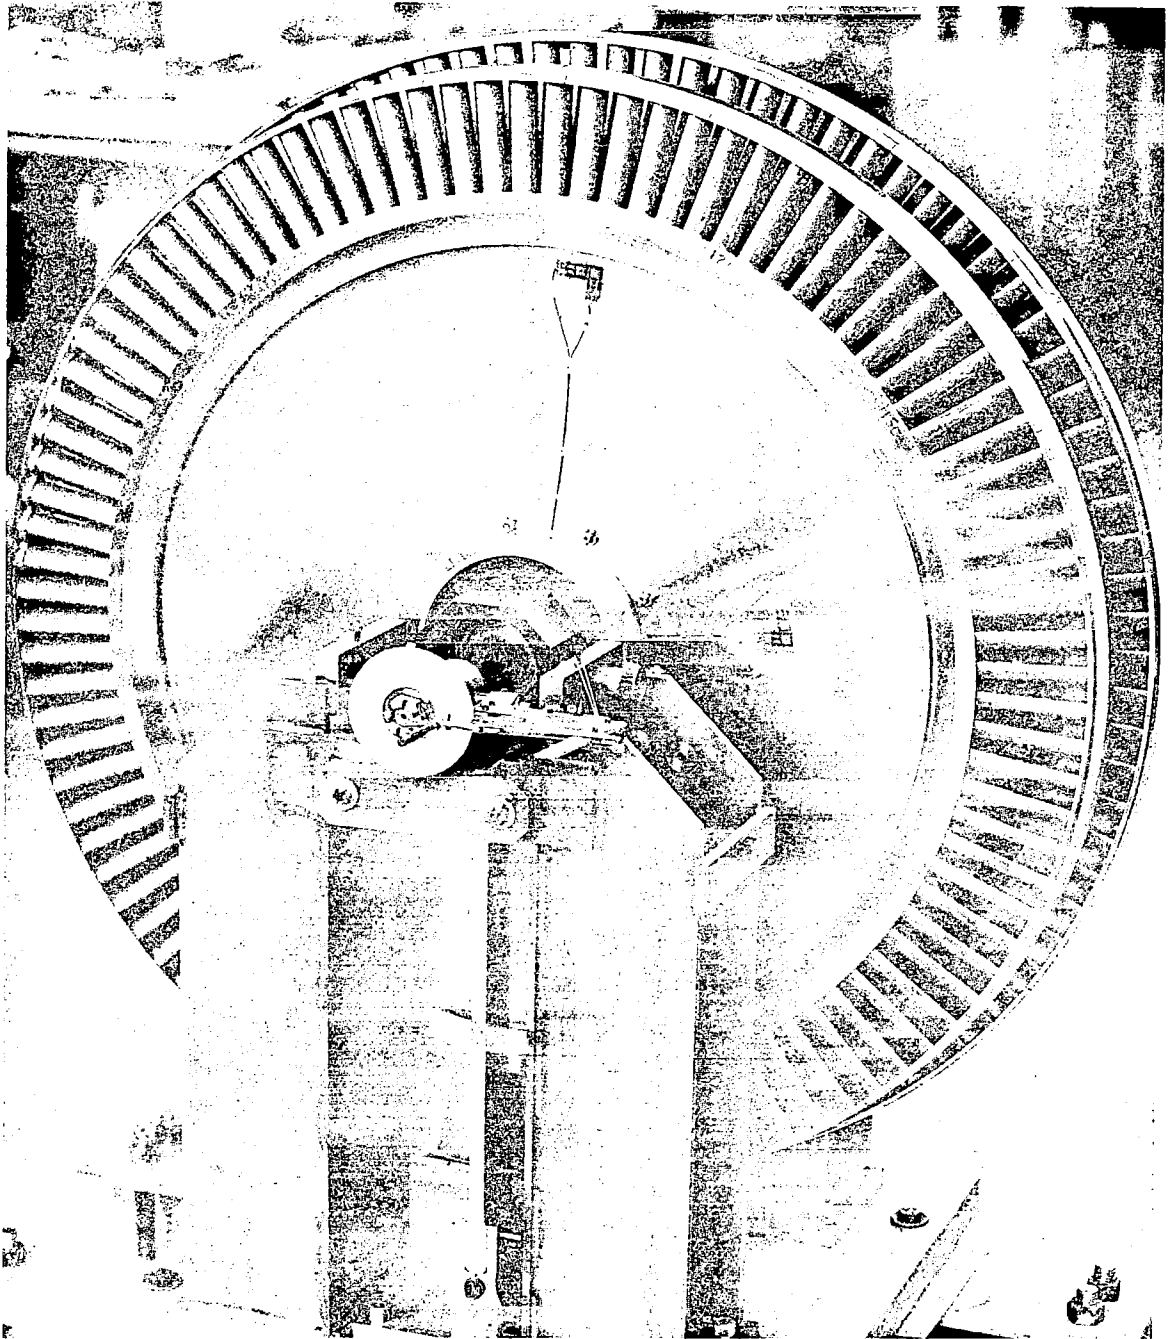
TEST ROTOR MOUNTED IN MEASURING AND BALANCING RIG
